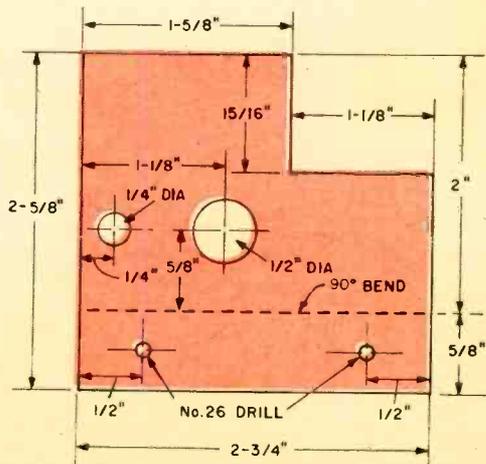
Shield plate. Nuvistor socket is mounted in 1/2-in.-dia. hole; resistor R3 fits in grommet in 1/4-in.-dia. hole. Bend the bottom toward you.
